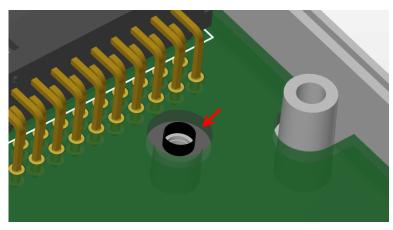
ensuring a clear space surrounding the non-plated mounting holes. In addition, the green solder mask must be removed near the hole in order to prevent solder mask delamination due to mechanical stress.
